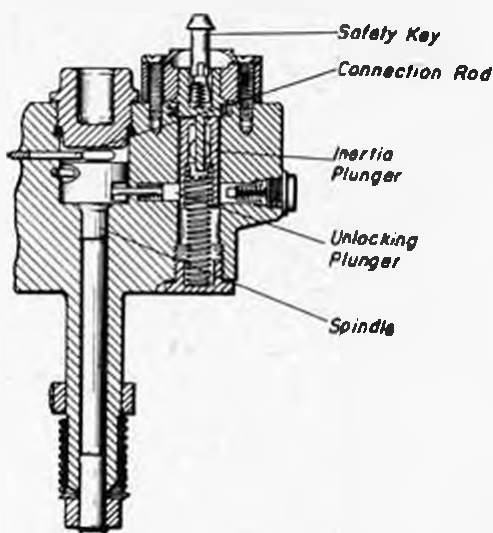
Squid Inertia Arming Mechanism, Sectional View
